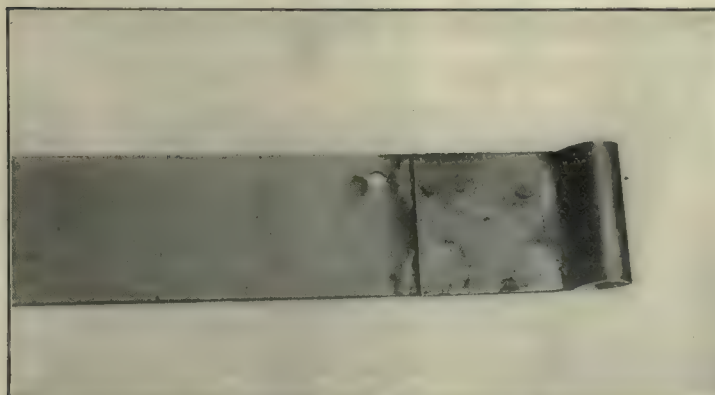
WELDED END OF GAS-TANK STRAP
